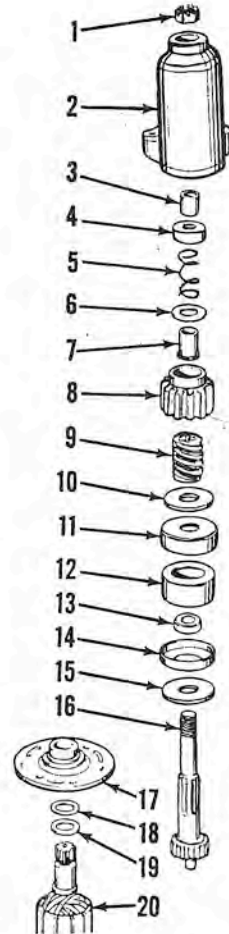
Exploded view of gear reduction starter drive used on four cylinder models.
